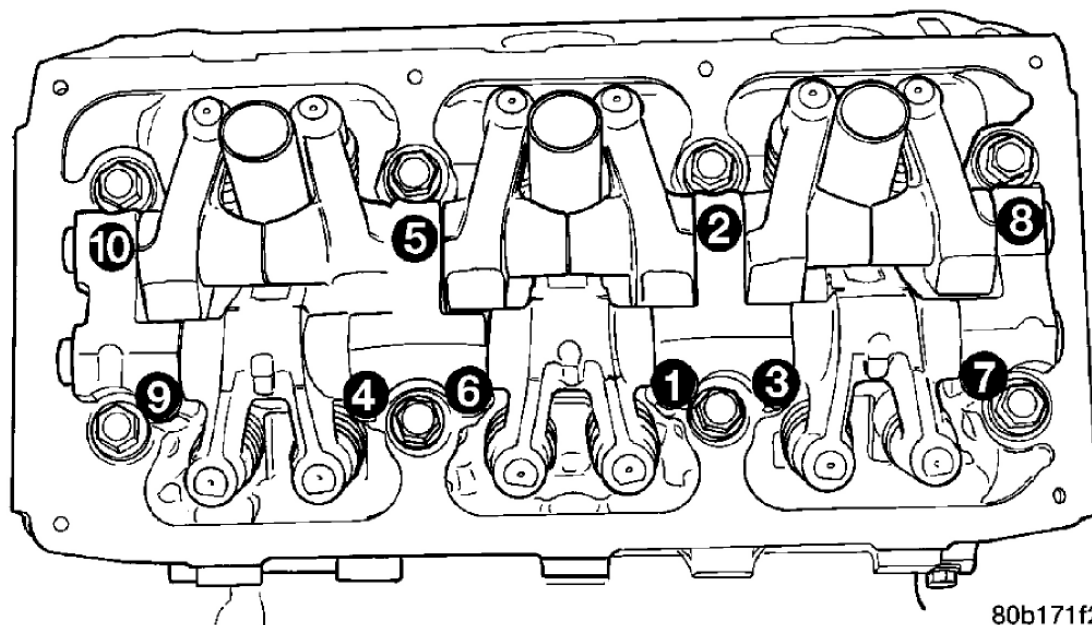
ROCKER ARM AND CAMSHAFT ASSEMBLY
